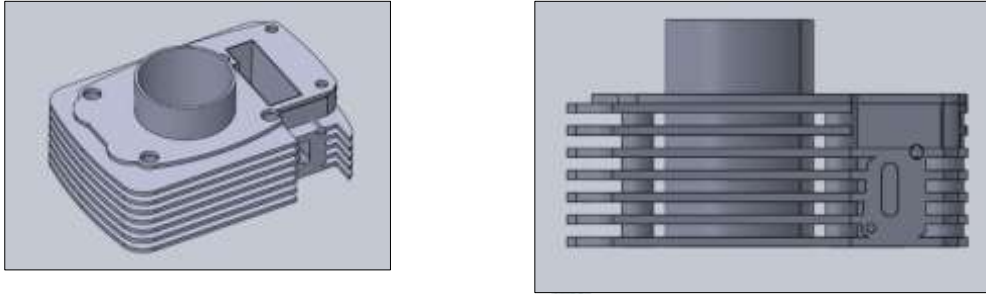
Engine cylinder block with 5 mm fin thickness
